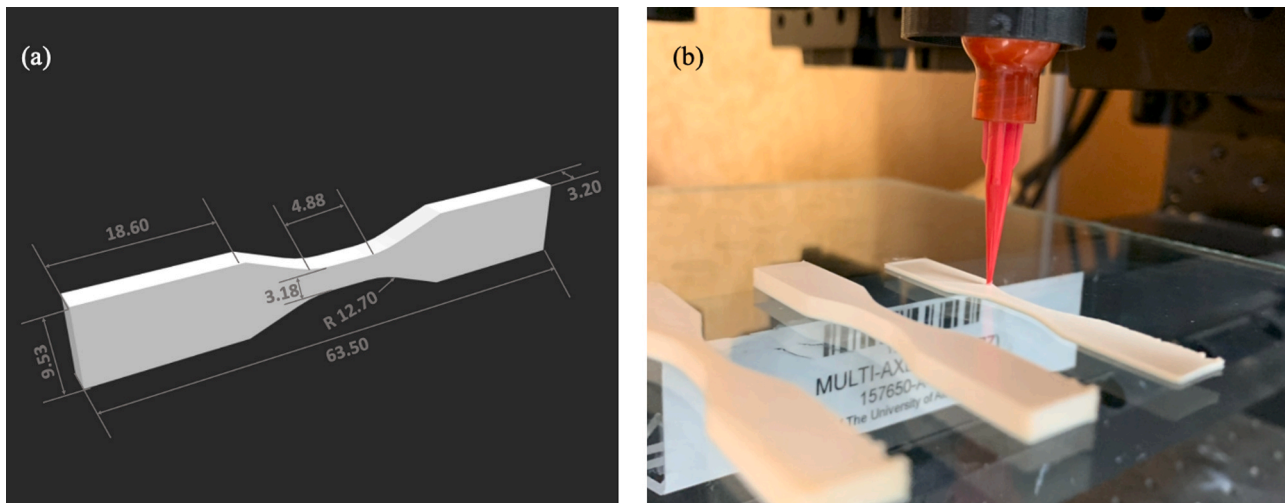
ASTM D-638 Type V dogbone specimen used for tensile tests: (a) 3D model (dimensions in mm), (b) printing of the specimens.
